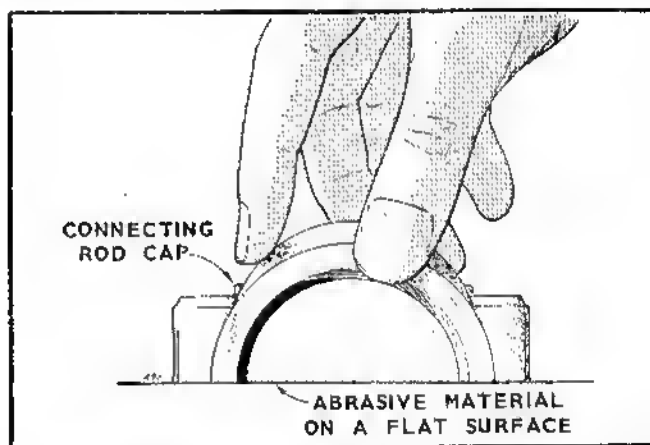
REDUCING ROD BEARING CLEARANCE
